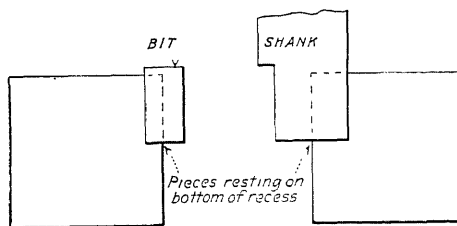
Method of Preparing for an Insert Weld.
